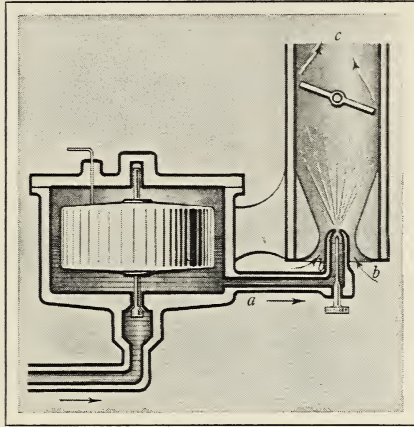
The Carburetor of an Automobile Engine mixes the Gasoline with the Air
